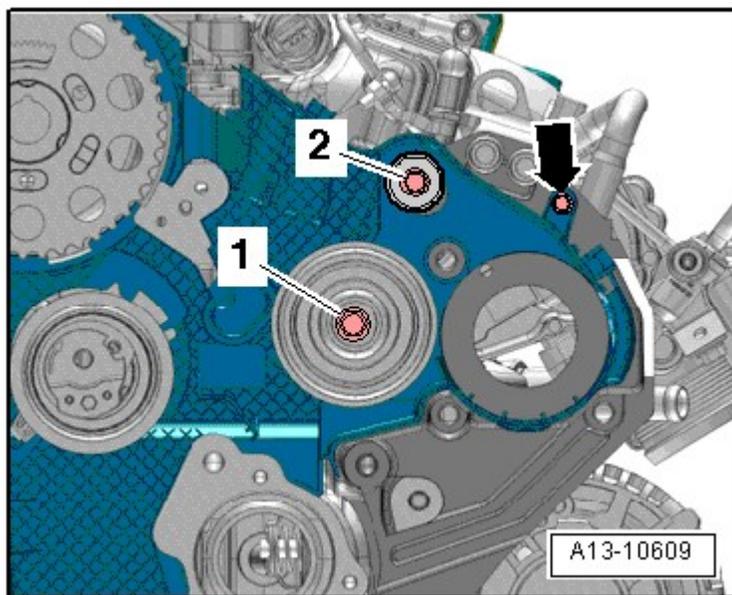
Identifying Idler Roller Bolts -1 And 2-
